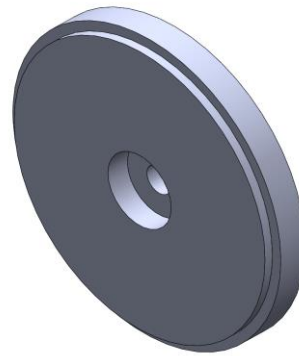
Inside face of the lid, showing the hole for a bearing.
